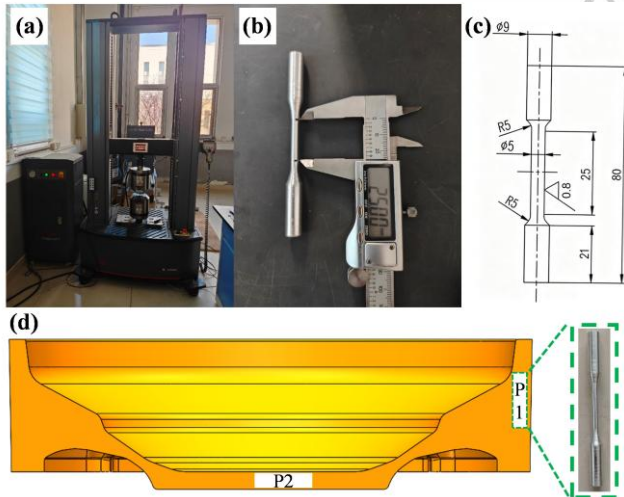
Tensile test of aluminum alloy wheels: (a) MTS tensile testing machine, (b) tensile test specimen, (c) schematic of tensile specimen dimensions, (d) sampling location.
